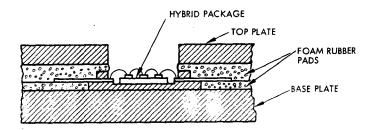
Cross-sectional view of hybrid masking tooling for horizontal lead hybrid package.
